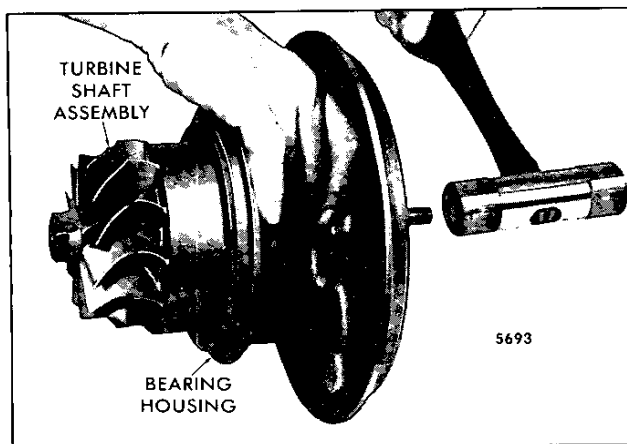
Tapping Turbine Shaft Assembly from Bearing Housing
